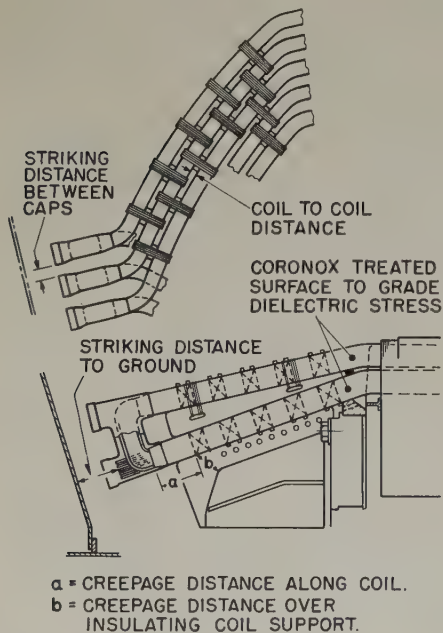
General construction of stator end windings, insulating caps, and coil supports of an inner-cooled generator
